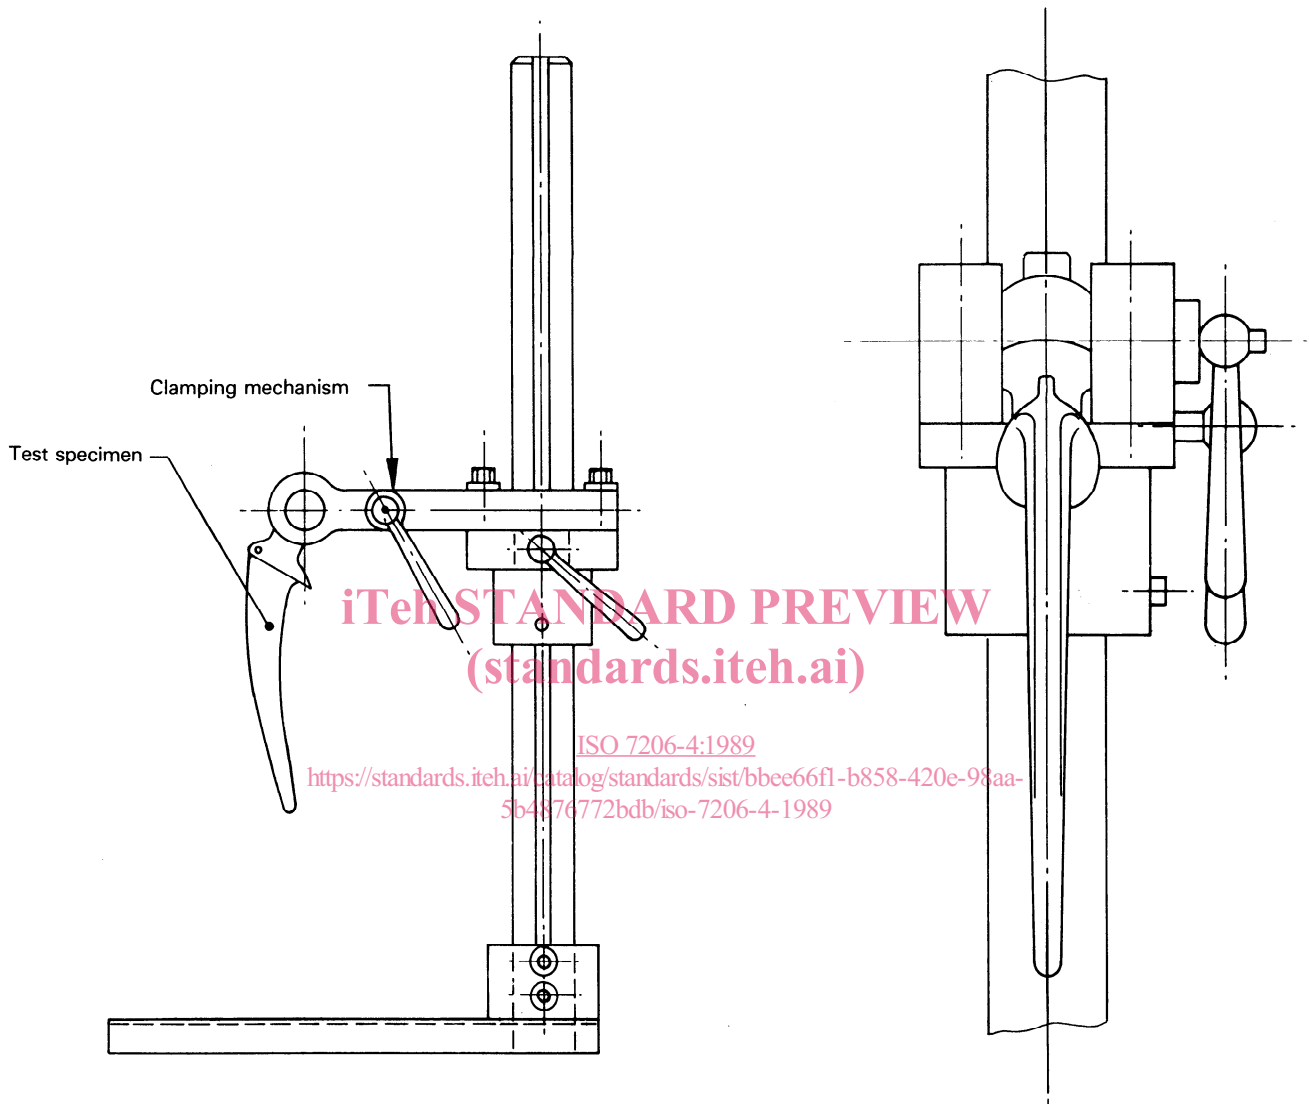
Example of a device for gripping the head of the test specimen during setting-up (see 6.7)
